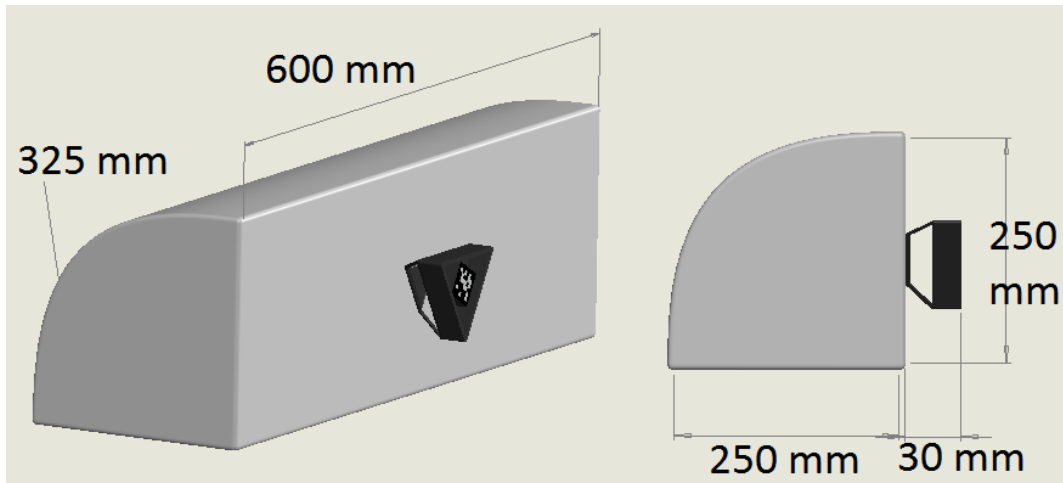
Reentry vehicle payload and preliminary handle positioning. This tool is attached to the payload external surface. The dimensions were reported in mm [41].
